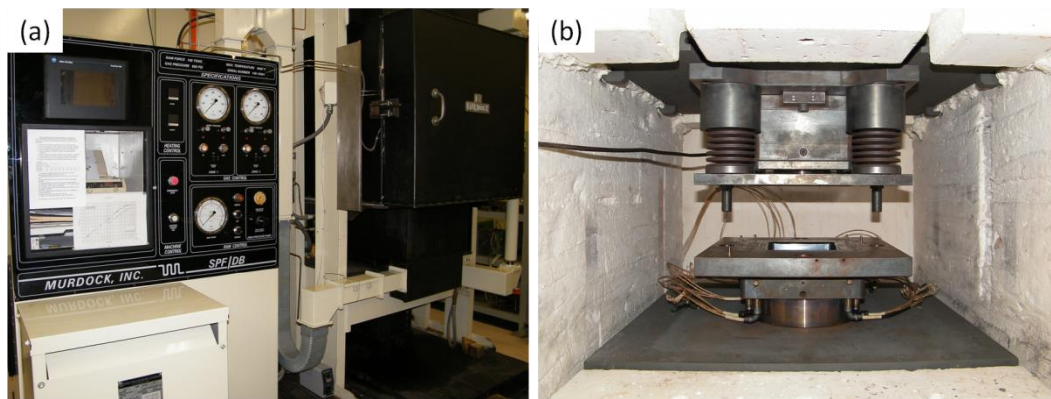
Experimental set-up of superplastic-like forming machine: (a) Murdock SPF/DB press and (b) die assembly inside the furnace.
